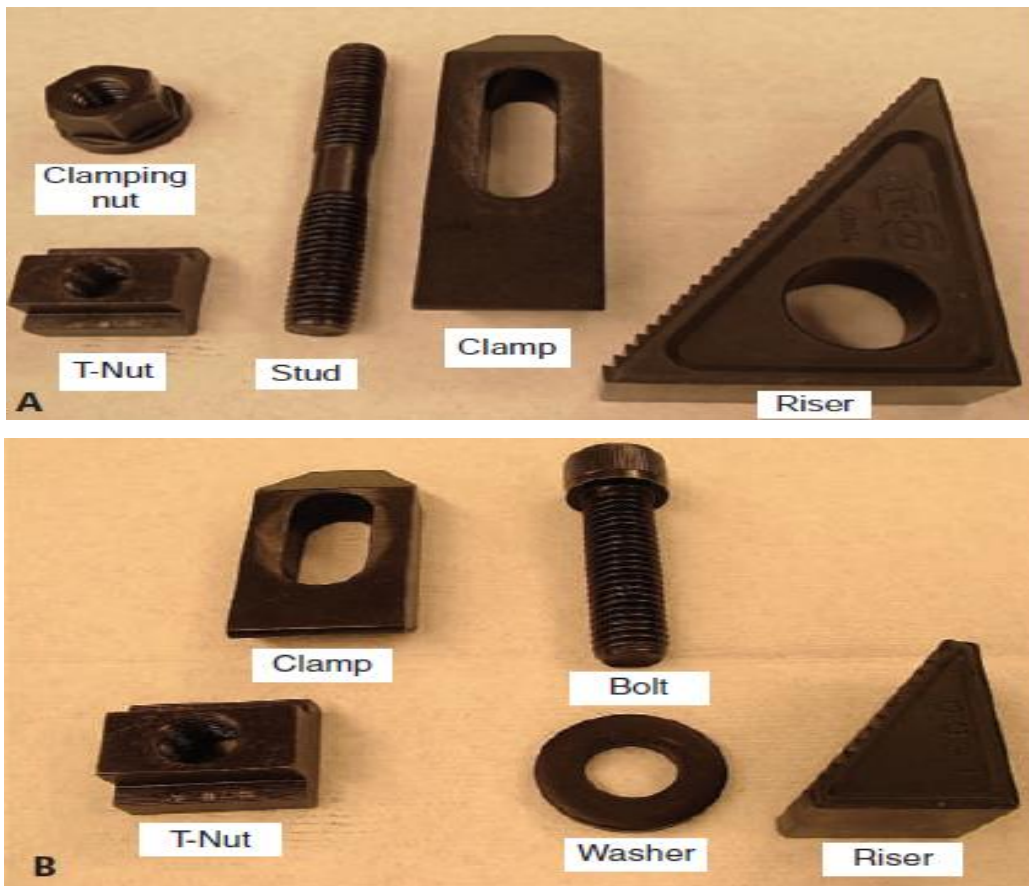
(A) A step clamp assembly usually contains a T-nut, stud, clamp, riser block, and clamping nut. (B) A bolt and washer may be used in place of the stud and nut
